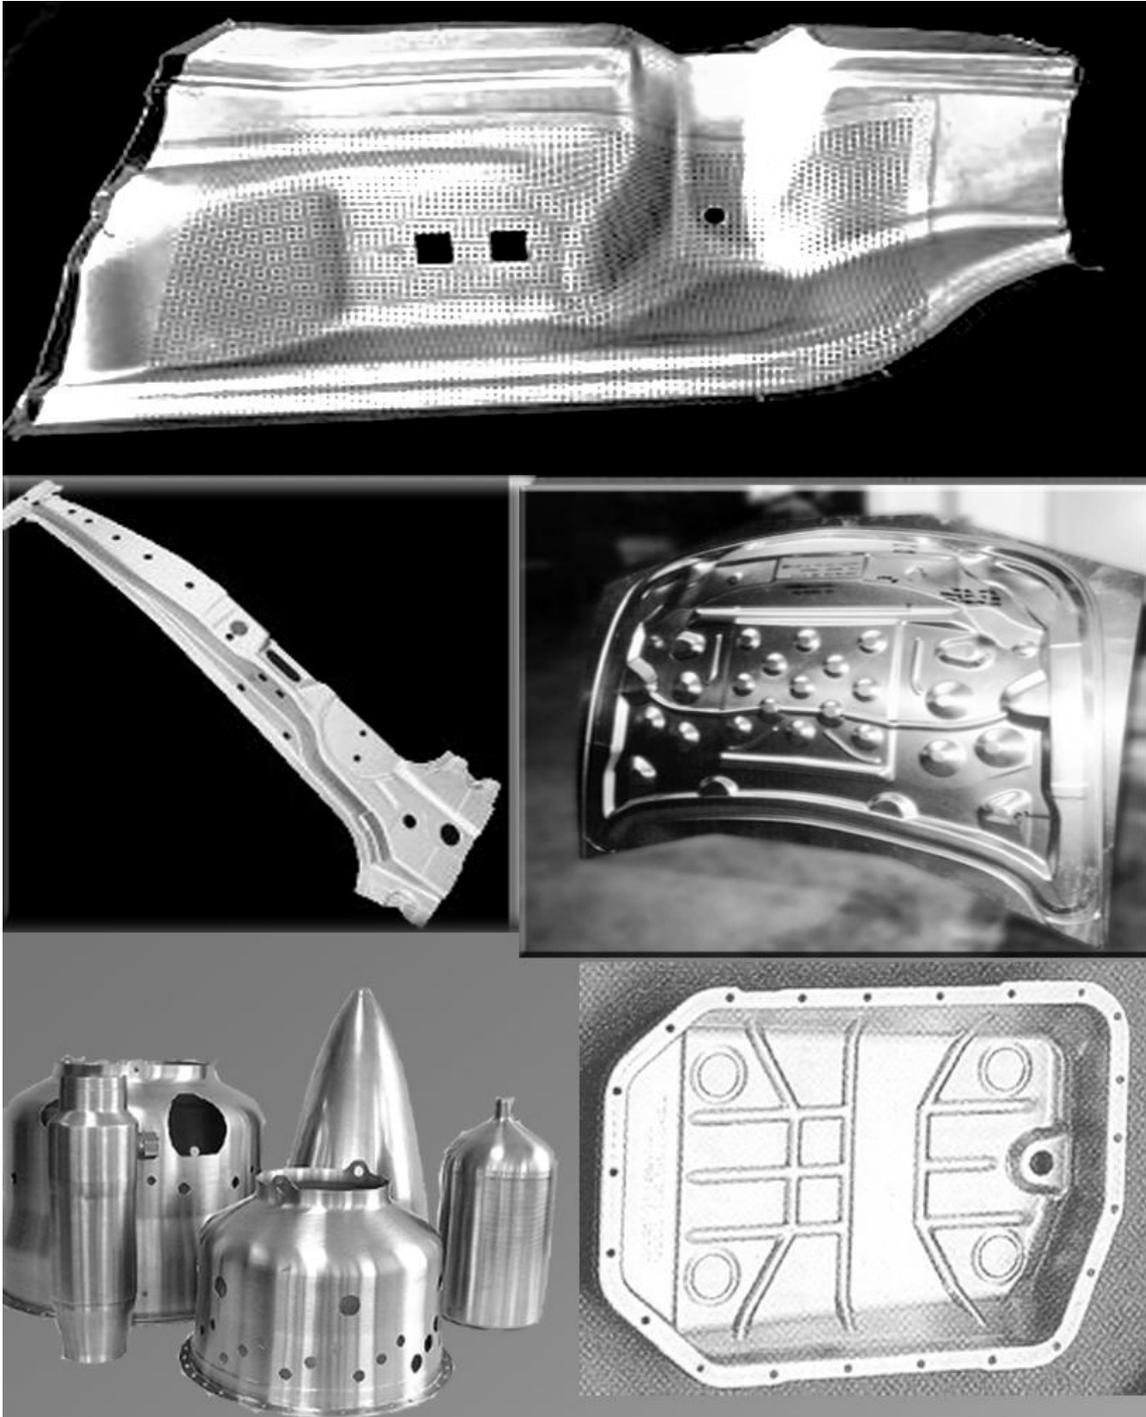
Some parts manufactured by sheet metal forming operation [4]
